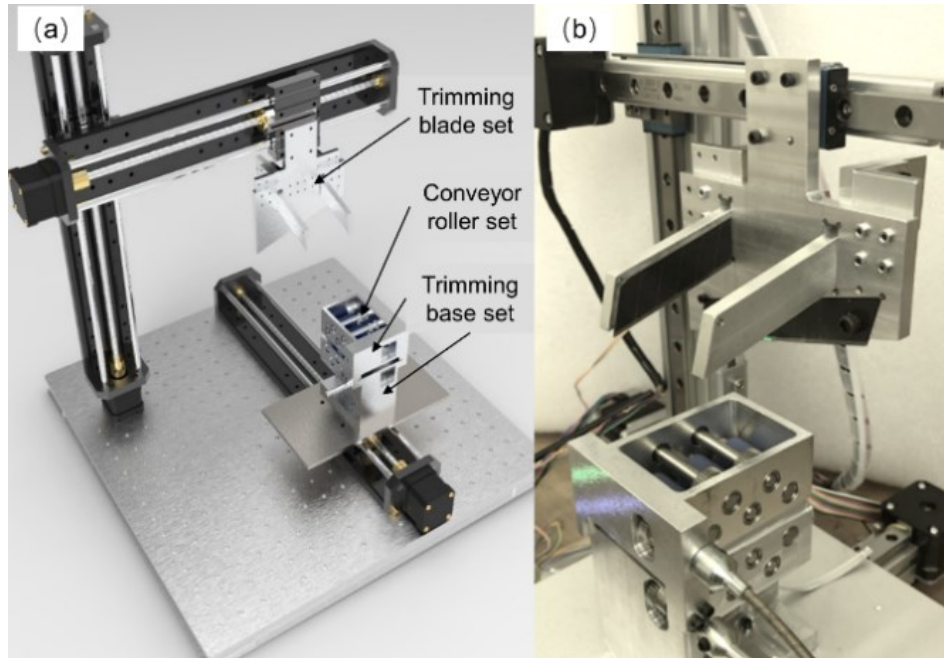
(a) CAD design and (b) Prototype of the pouch removal module.
